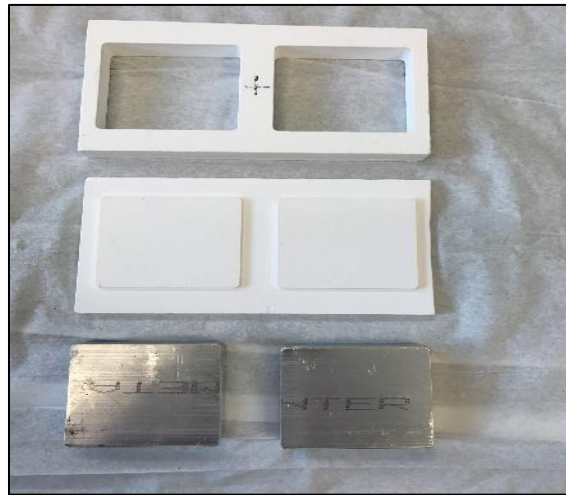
This is a 2-inch square alumina ceramic form and baseplate and two aluminum rams or pistons. The form is placed on the baseplate and powder placed into the form. Then the ram is used to compress the powder.
